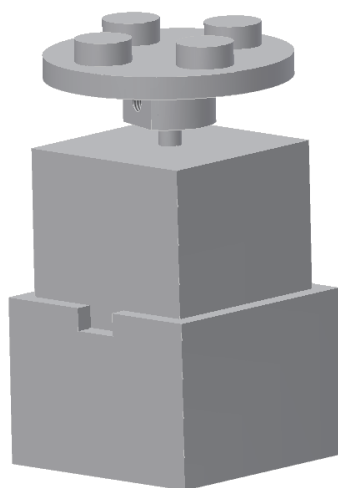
An Autodesk® Inventor™ CAD drawing of the stepper motor jig.
